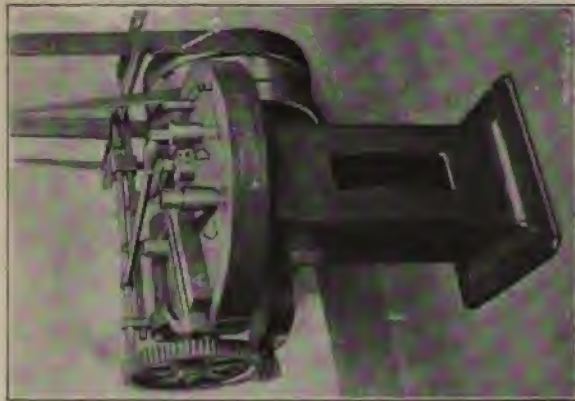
Machine for Making Bending Test on Titanium-steel Bars
